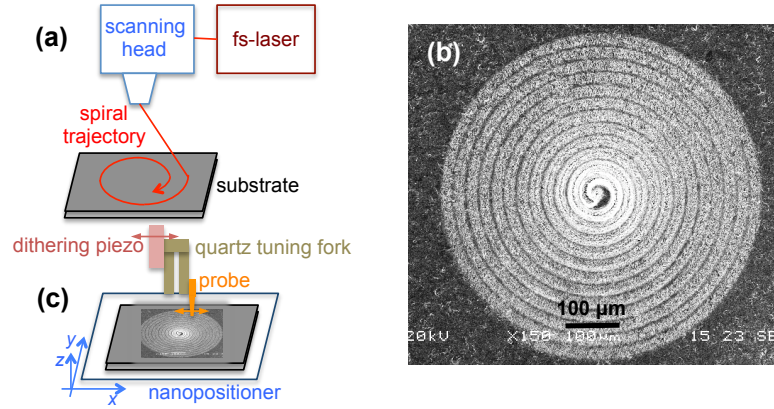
Sketch of the laser machining apparatus (a); a SEM image of a stainless steel sample machined with $N_{\text{turn}} = 12$ (b); sketch of the ShFM head (c). Schematics are not to scale.
